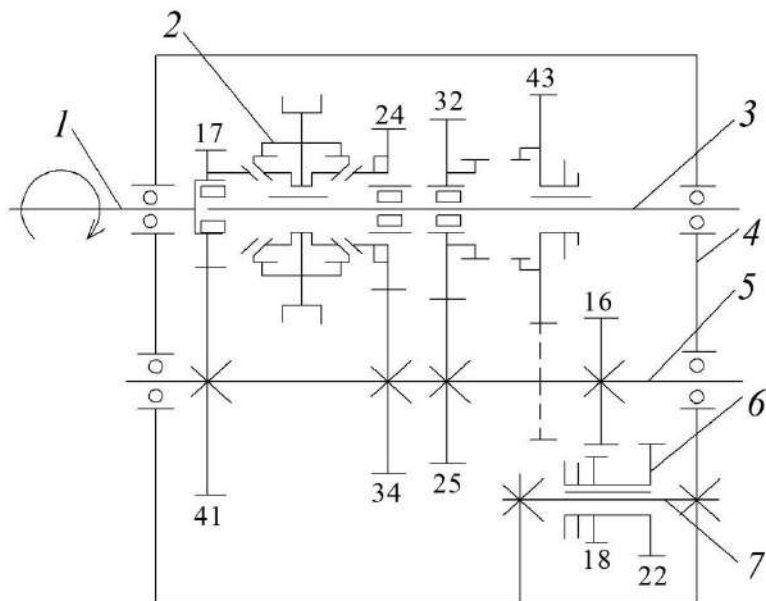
Kinematic diagram of the GAZ-66 gearbox: 1– input shaft; 2– synchronizer and clutch for third and fourth gear; 3 – secondary shaft; 4– crankcase; 5– intermediate shaft; 6– reverse gear unit; 7– reverse axle
